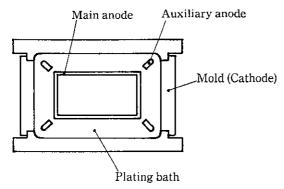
Schematic arrangement of Ni-Fe plating on mold inside
